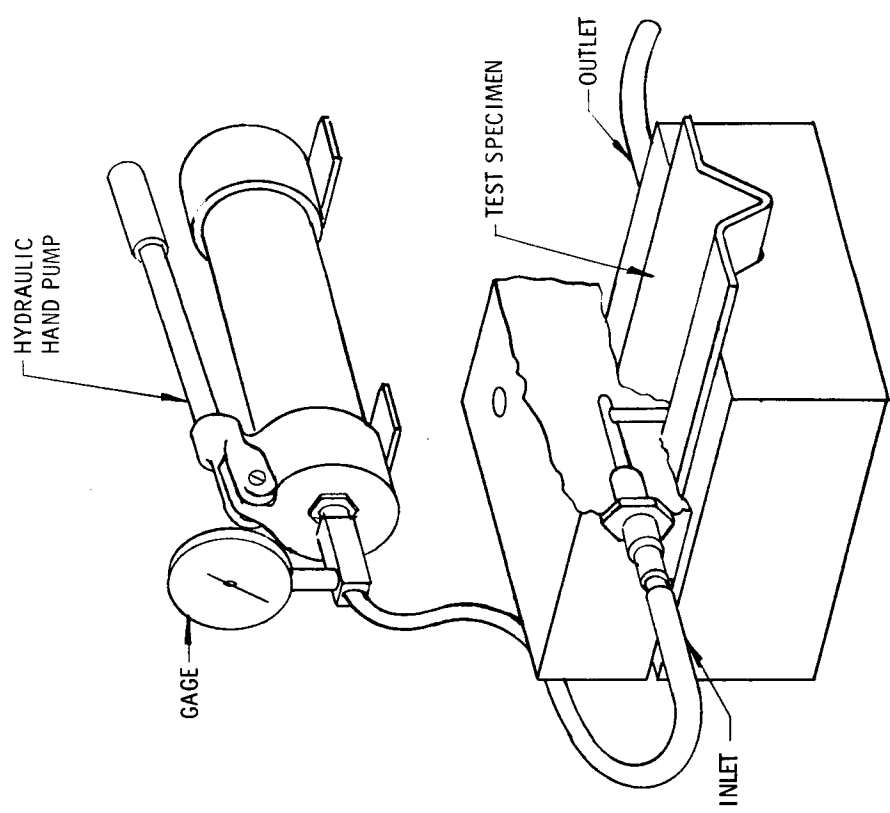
Burst Test Fixture for 0.5-In. Convolute
